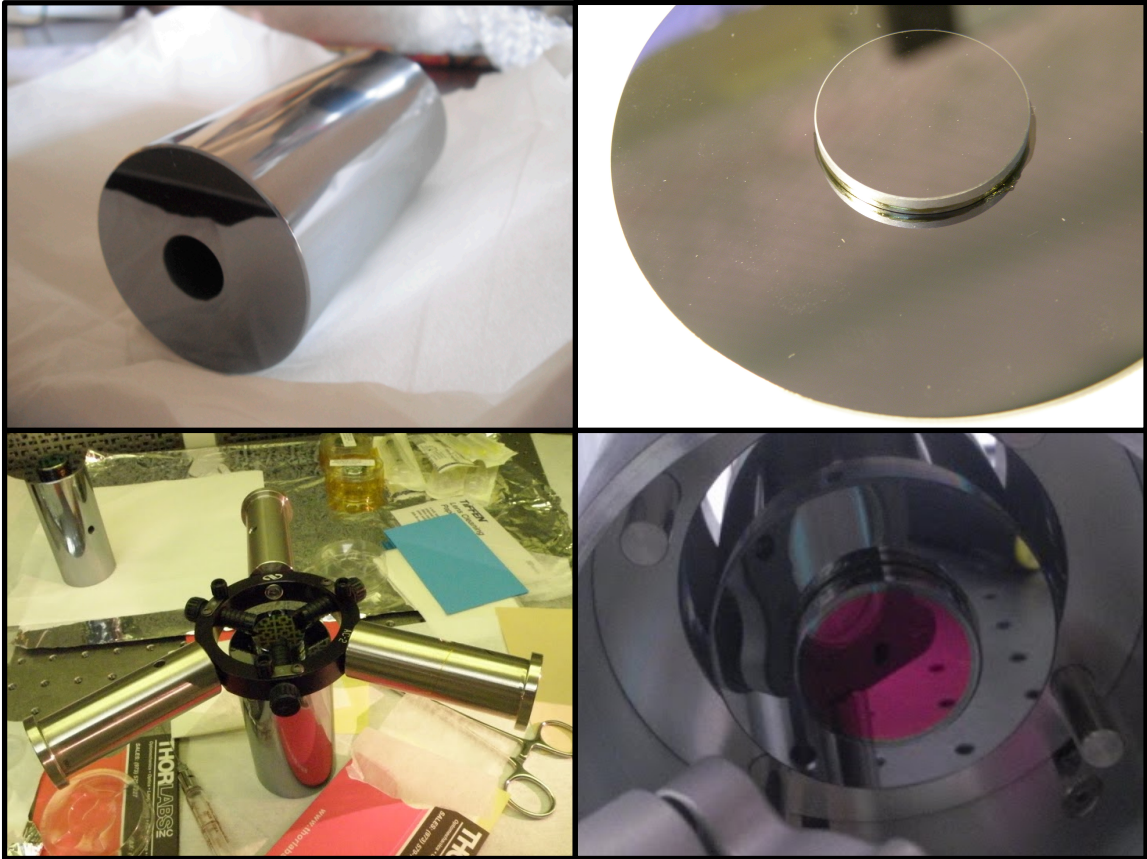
Silicon Cavity Assembly. From top left to bottom right: Machined and polished silicon boule, silicon blank on wafer demonstrating gluing technique, jig used for cavity + mirror assembly, and assembled silicon spacer with silicon mirror glued to front face.
